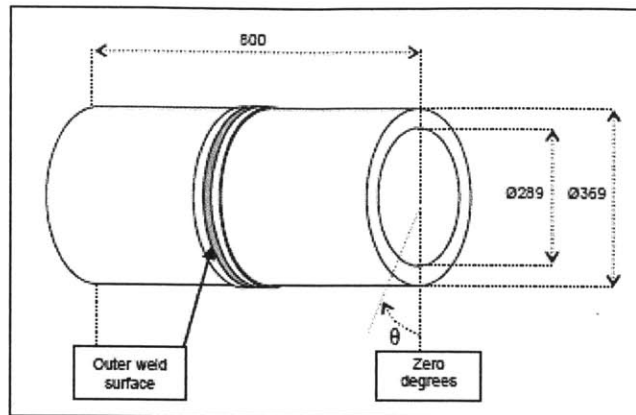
Welded Pipe, dimensions in mm [Ogawa et al., 2008]
